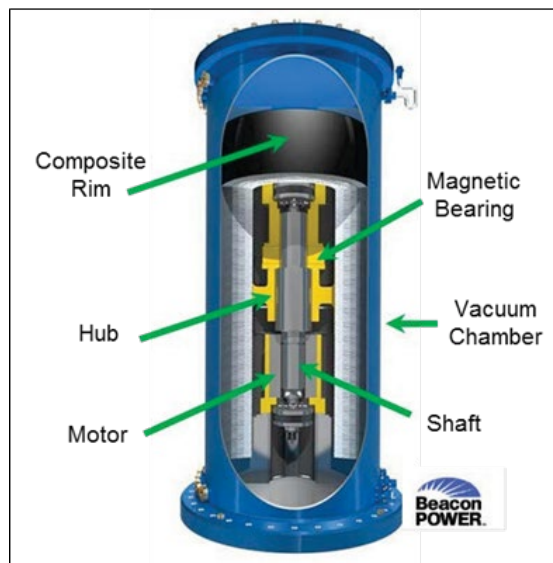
Integrated flywheel system package cutaway diagram (courtesy Beacon Power) [5]
